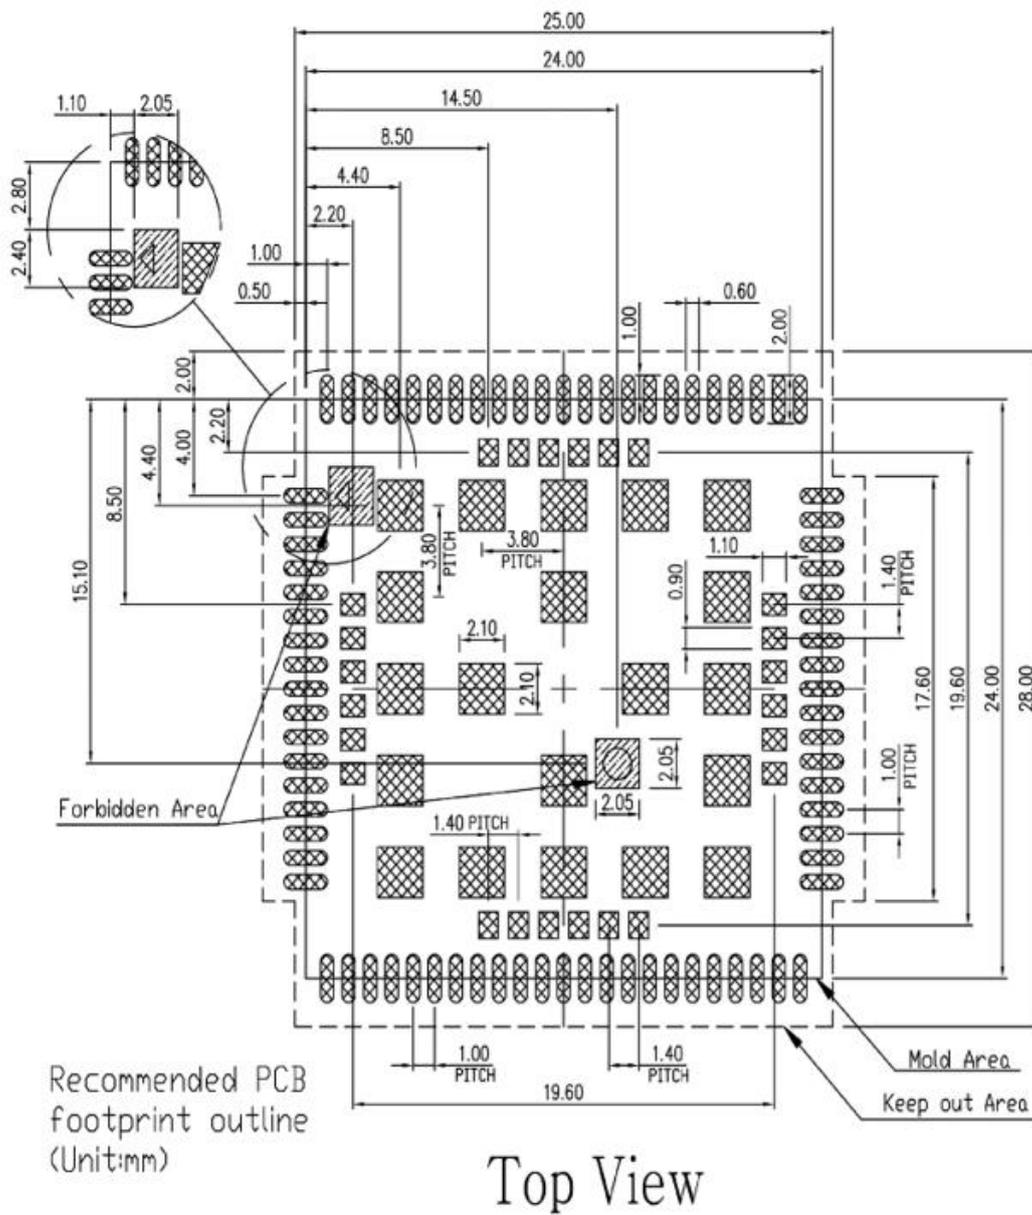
Recommended PCB footprint outline for A7672X (Unit: mm)
